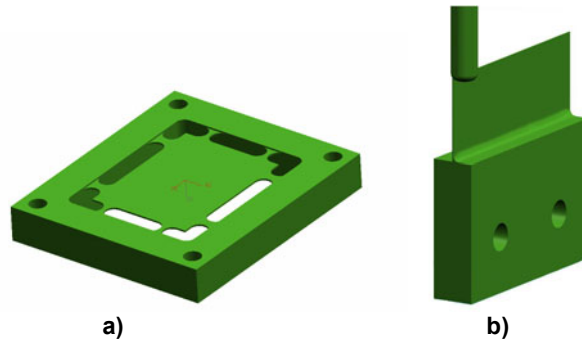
Test specimens: (a) Web specimen; (b) Rib specimen.
